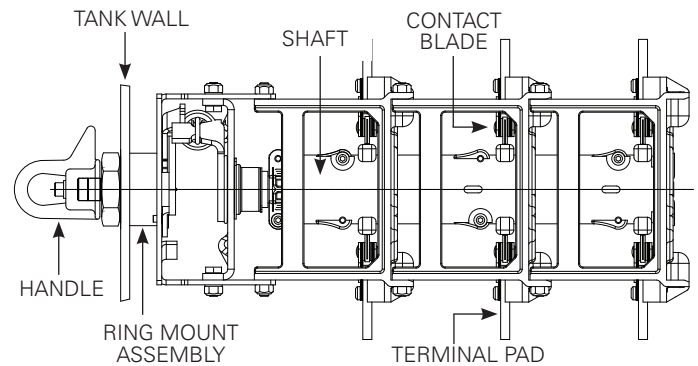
Line illustration of loadbreak switch with ring mount assembly.
